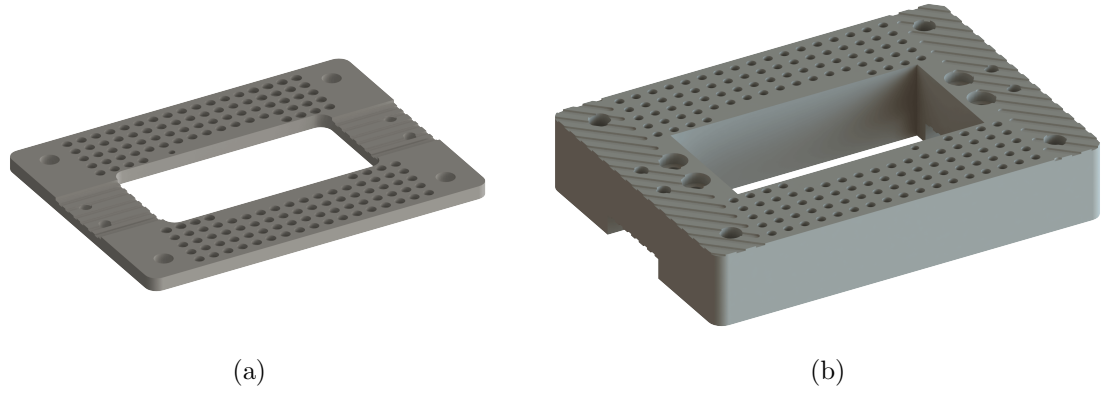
Top (a) and bottom (b) PEEK plates used to hold gold plated pin receptacles.
